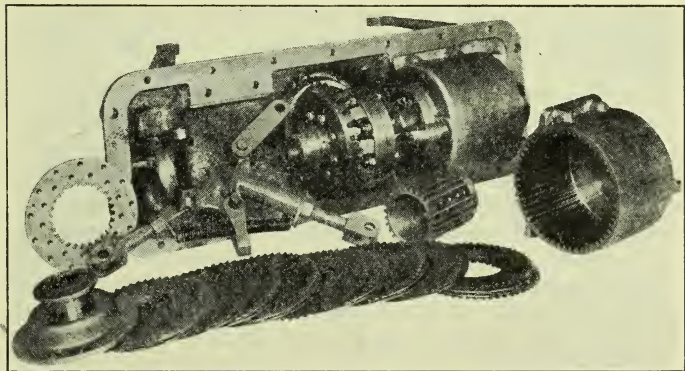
THE CONSTRUCTION OF THE BRAKE IS VERY SIMILAR TO THAT OF A MULTIPLE-DISC CLUTCH
